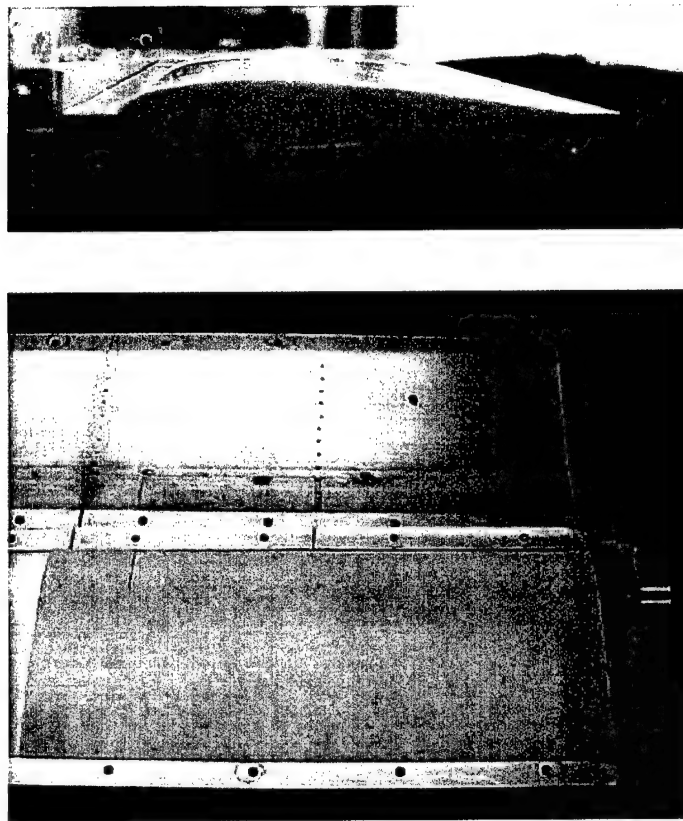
Aluminum mold used to cast the NACA 0015 airfoil.
